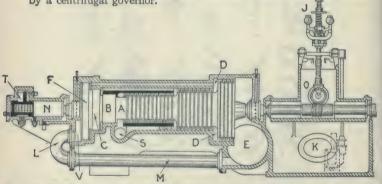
,750.—Sectional view of Parsons-Westinghouse turbine, showing rotor and governor.
